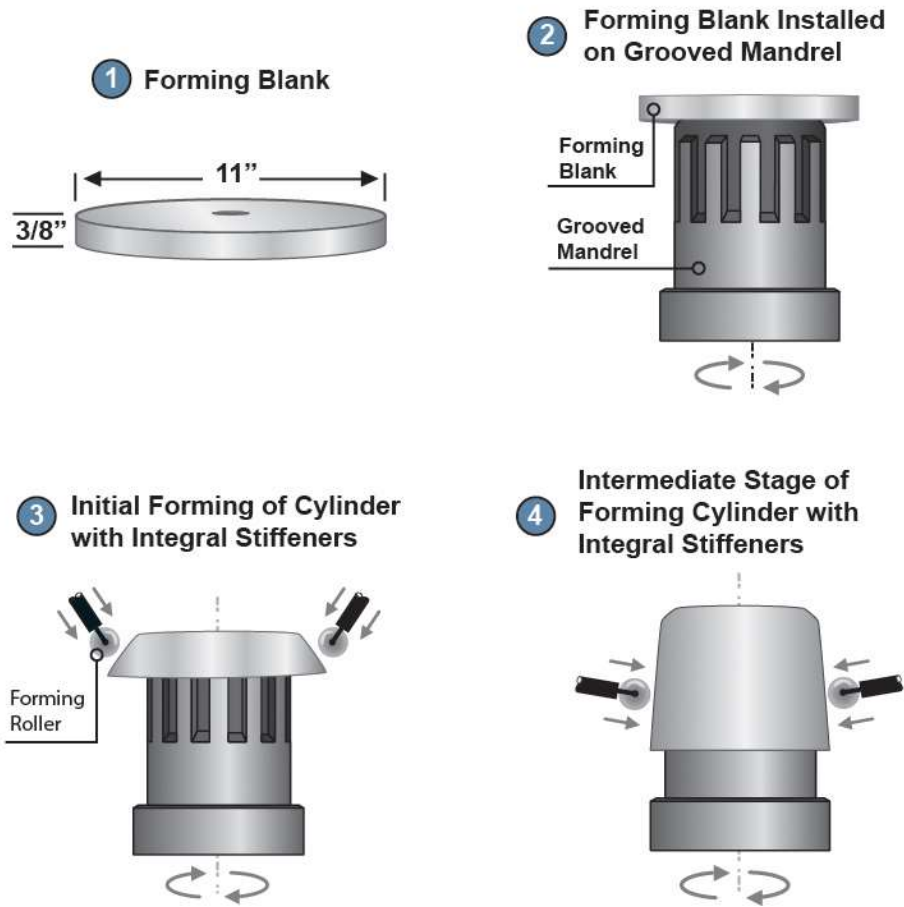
Subscale ISC forming process using automotive clutch housing machine.
